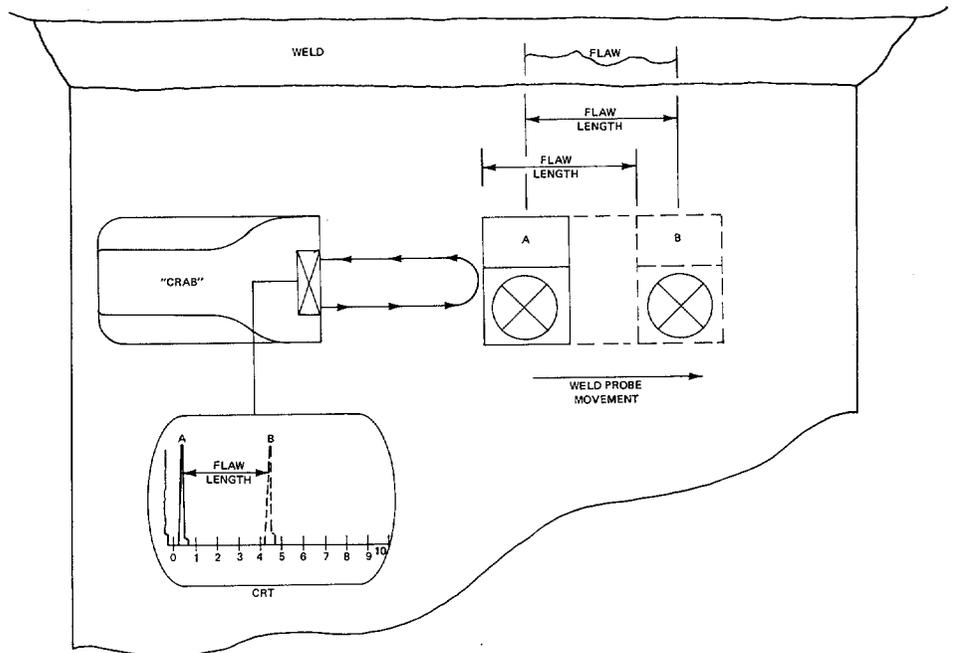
The crab is positioned facing the weld test probe. The longitudinal wave produced by the transducer in the crab creates CRT reflections that correspond to the distance between the probe and the crab.
